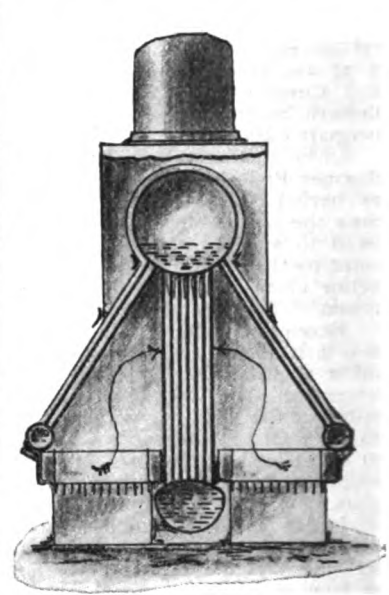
Cross Section of The See Vertical Water-Tube Boiler, Double High Furnace Pattern.
